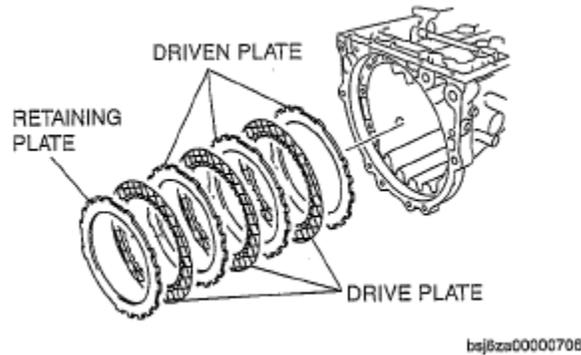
Identifying Retaining Plate, Drive And Driven Plates
